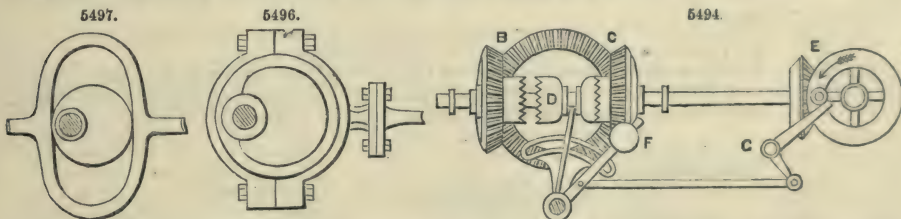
An eccentric generally used on the crank-shaft for communicating the reciprocating rectilinear motion to the valves of steam-engines, and sometimes used for pumping.
